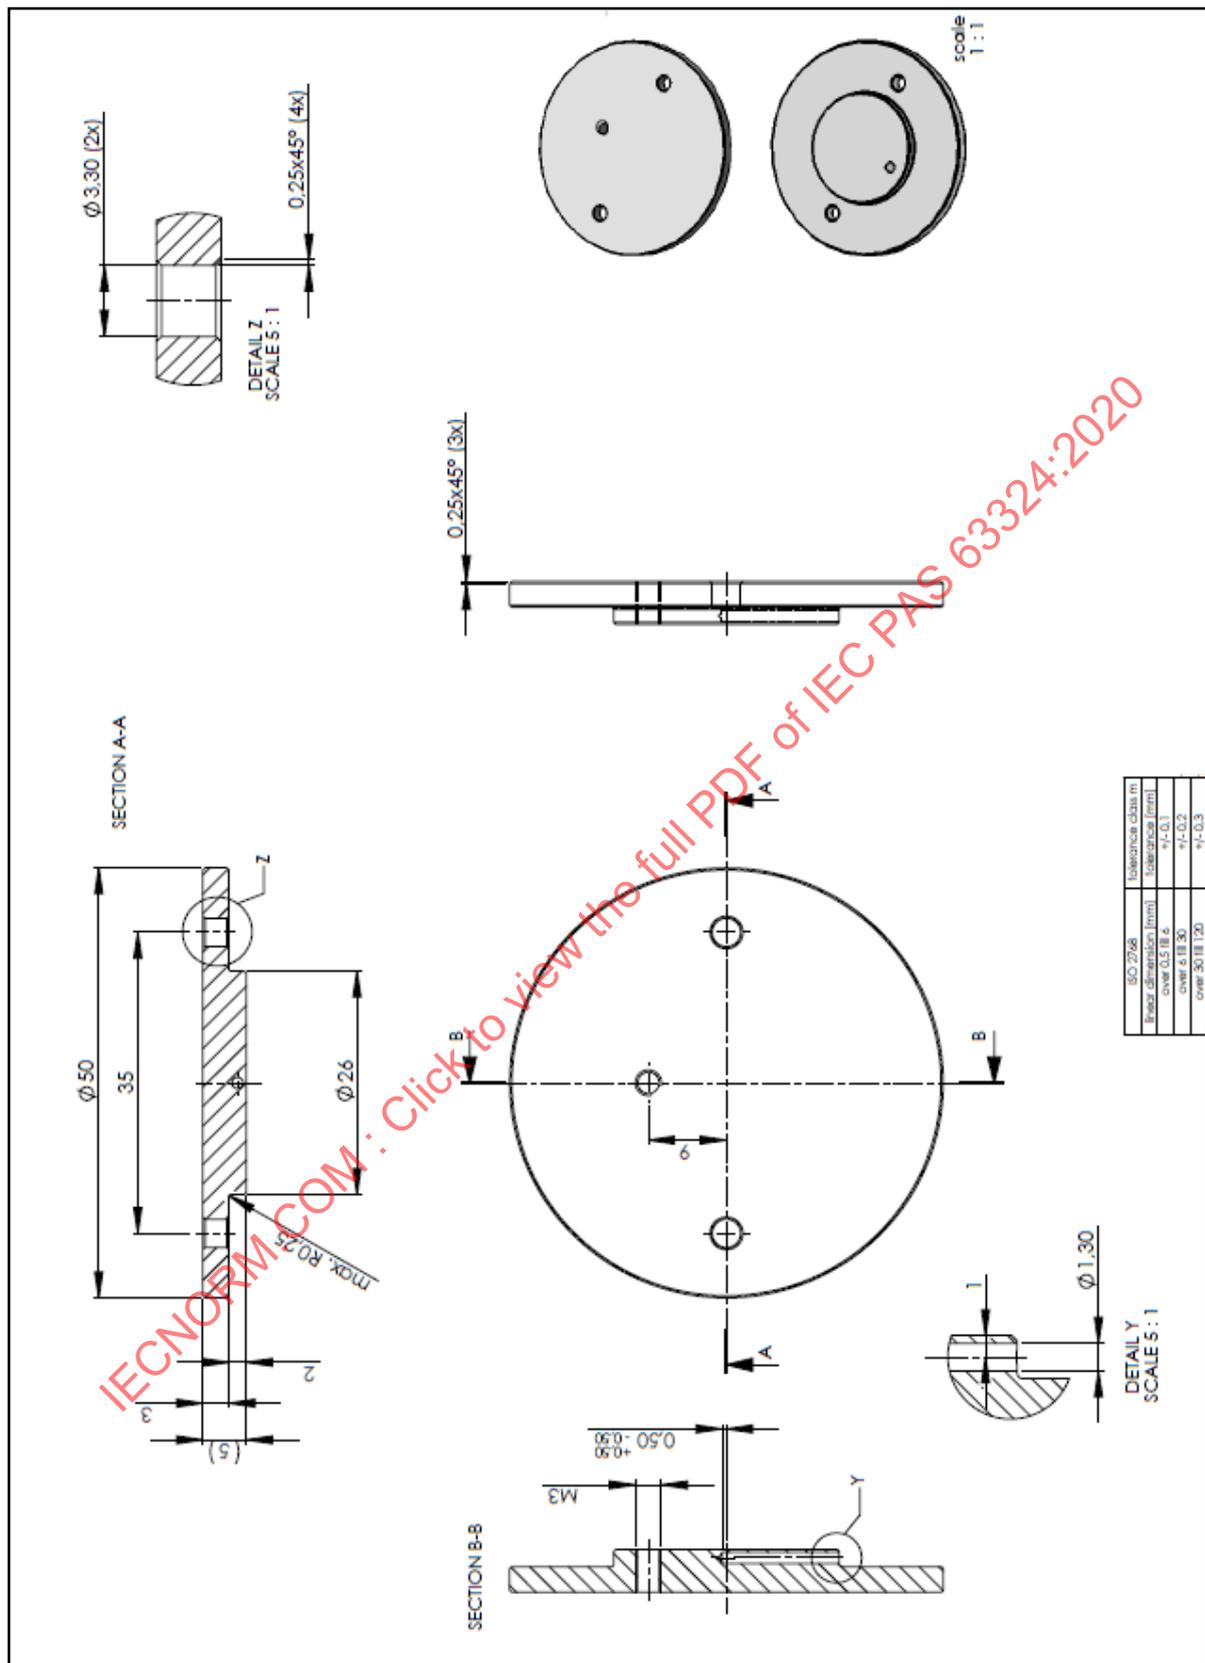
Thermal Test Engine TTE-Spot – technical drawing of the aluminum part
